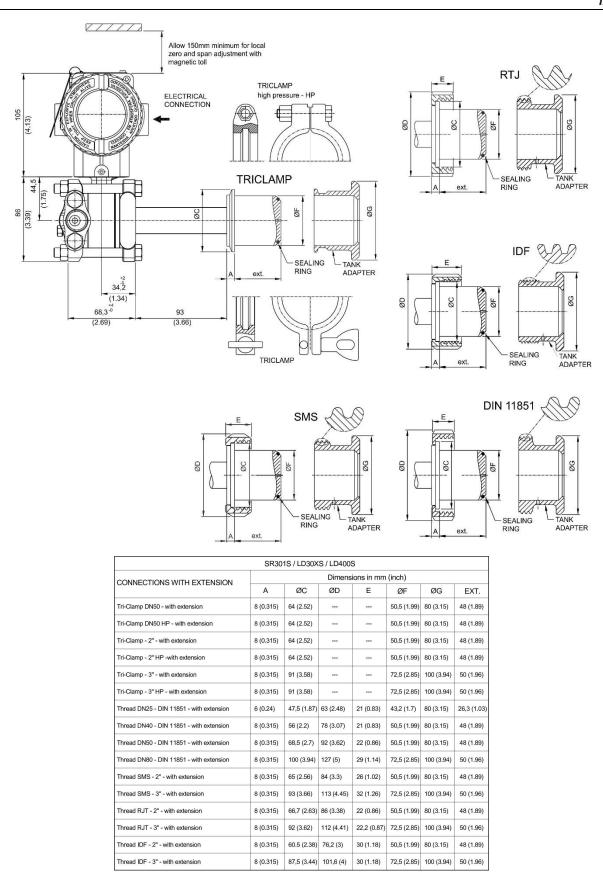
(d) – Dimensional Drawing and Mounting Position for the LD400 HART® – Sanitary Transmitter with Extension
